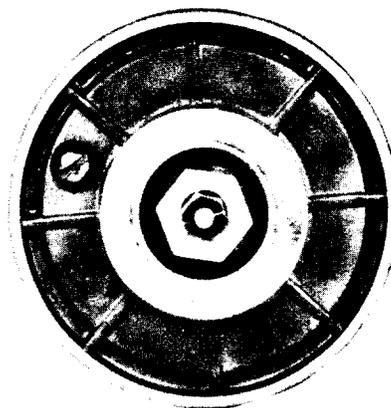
K1 and T3 Transmitter Unit, Rear View
